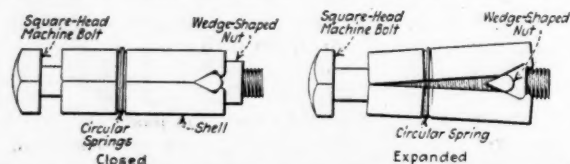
SINGLE-SPREAD TYPE OF EXPANSION BOLT
